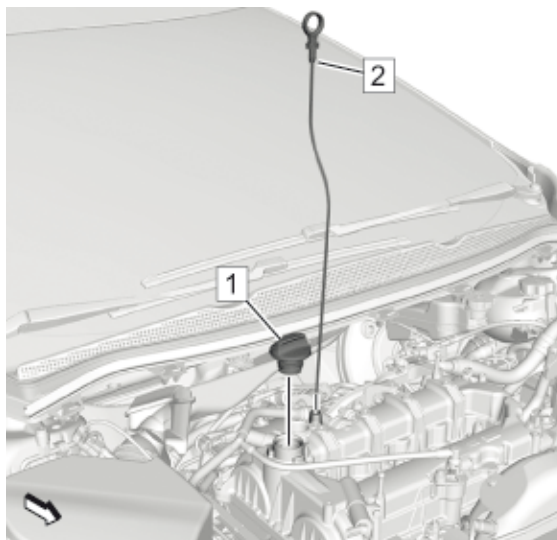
Oil Filler Cap And Oil Level Indicator Handle
